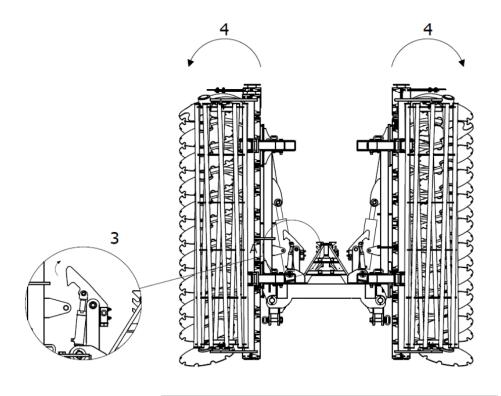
Machine opening sequence (3 - release of the hook of the hydraulic wing lock mechanism, 4 - opening of the machine wings)
